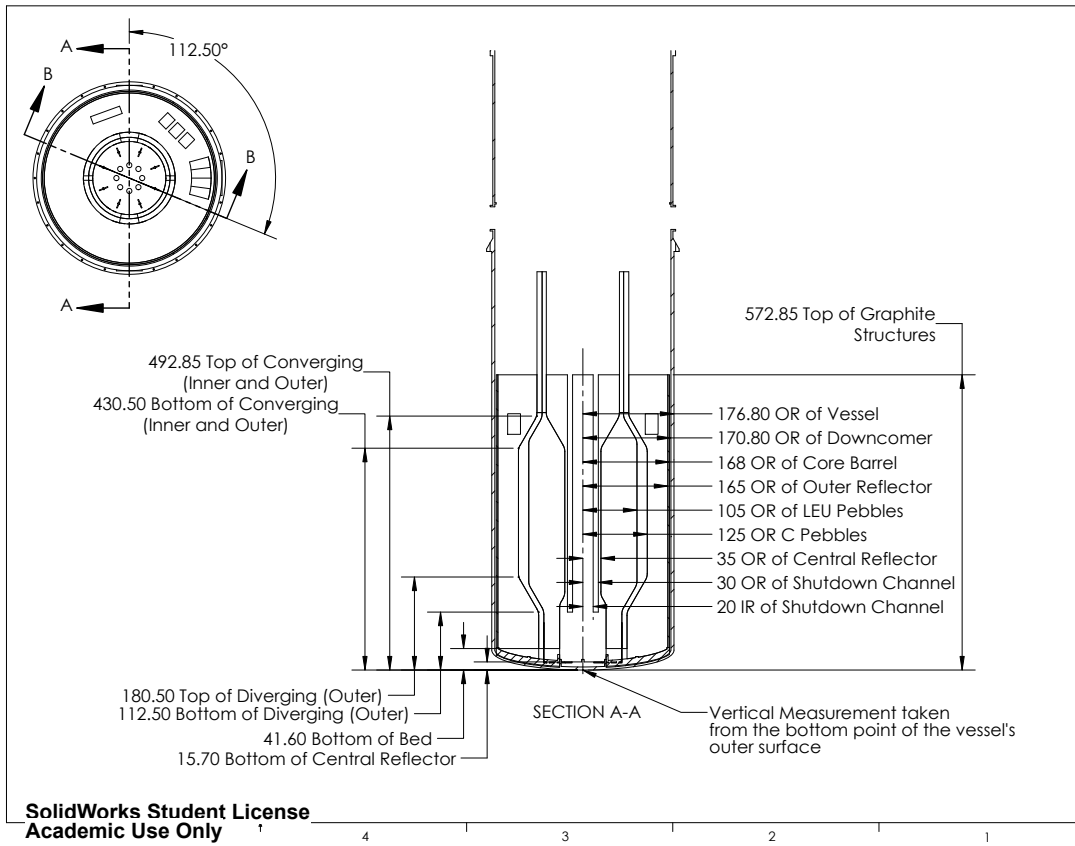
Design drawing of the Mk1 PB-FHR design: Section A-A
